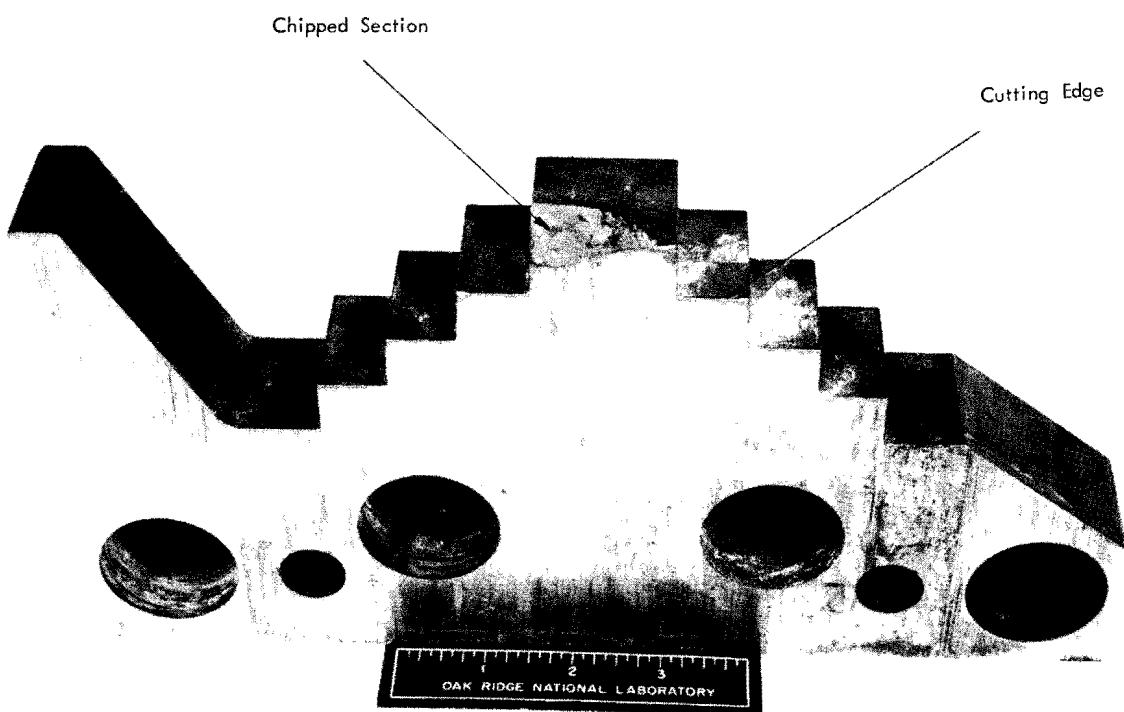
Squarkeen No. 3 moving blade showing chipped section of center step which occurred at 5892 cuts of the porcelain-filled ORNL Mark I prototype fuel assemblies.
